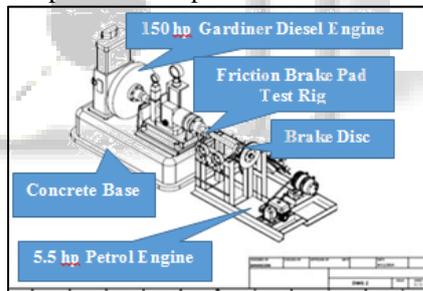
Isometric view of the Diesel Engine and Brake Pad Test Rig Assembly
